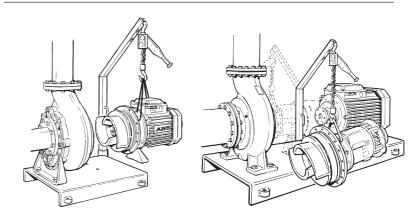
Close-coupled and 3b Bearing Assembly By using an ABS lifting arm one man can lift out the rotor from the casing.
